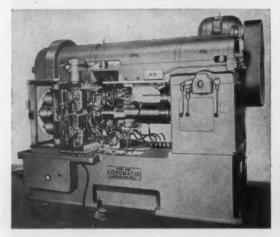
A six-spindle, Conomatic chucking machine which has a capacity of 9 3/4 inches
